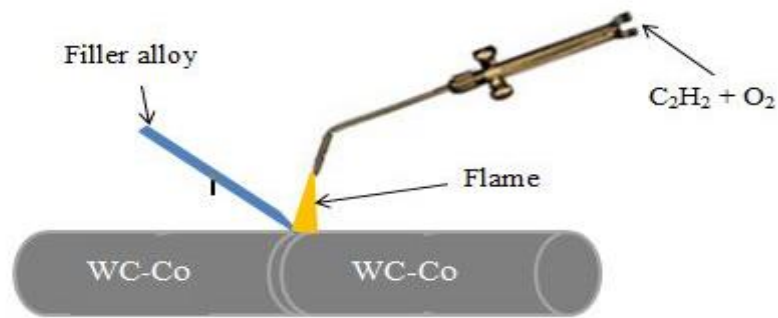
Schematic showing the assembly used for WC-Co brazing.
